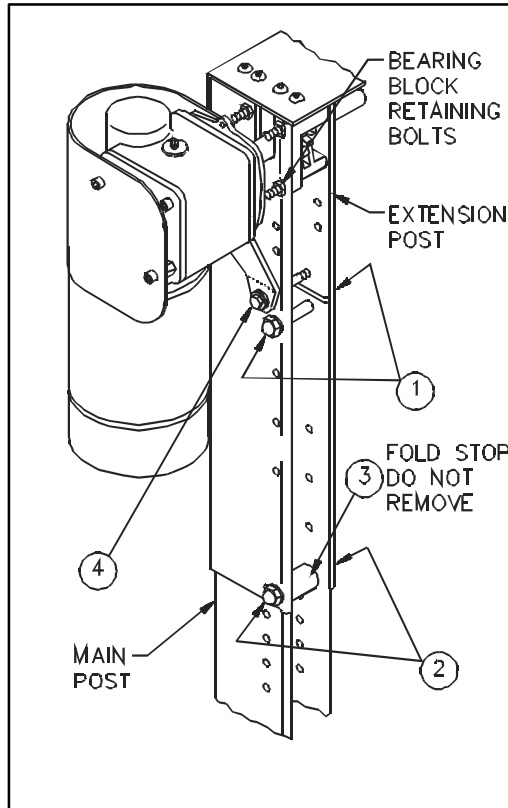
STANDARD CONFIGURATION - SHORTEN
